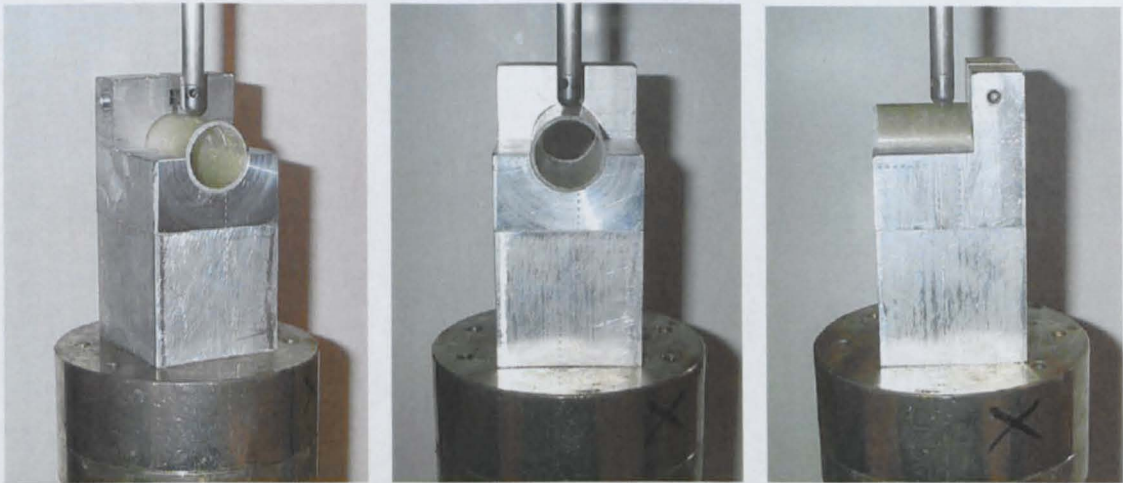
Fixture used to add damage to and drill small (38.1mm diameter) tubes
